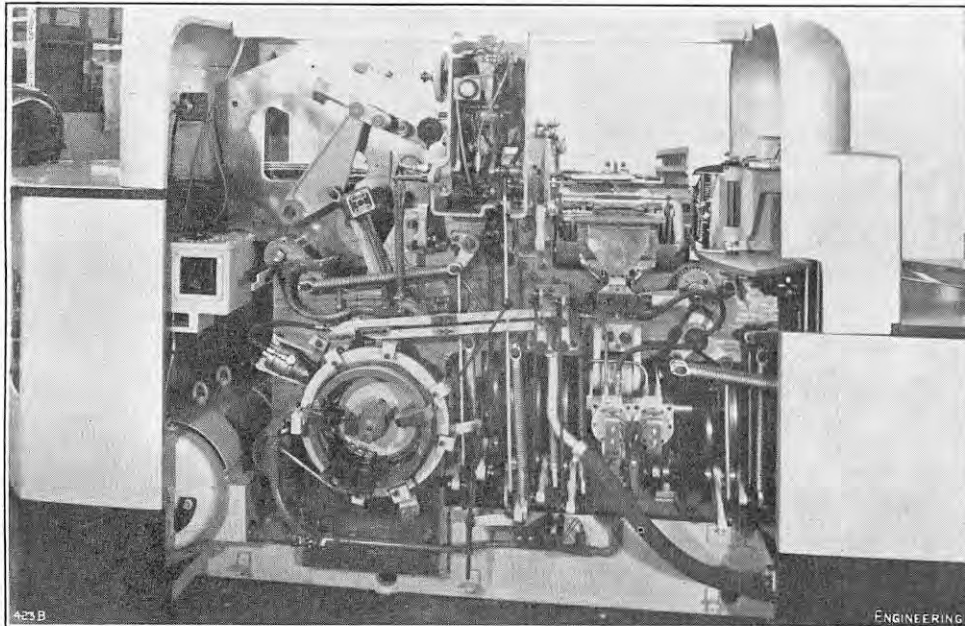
LEFT-HAND SIDE OF MACHINE WITH COVERS REMOVED.
